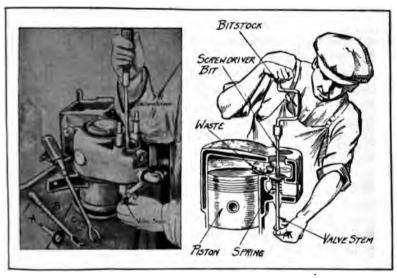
Showing Practical Methods of Valve Grinding. At Left, with Ordinary Screw Driver; at Right, with Screw Driver Bit and Bitstock.
